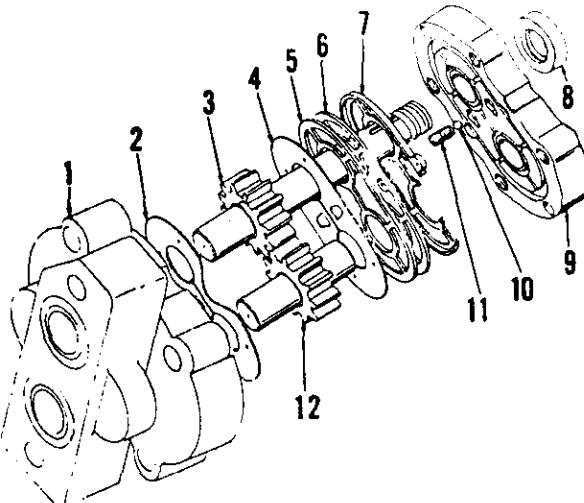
Exploded view of the Cessna hydraulic pump used on Series 424, 444, 2424 and 2444 non-diesel tractors.
